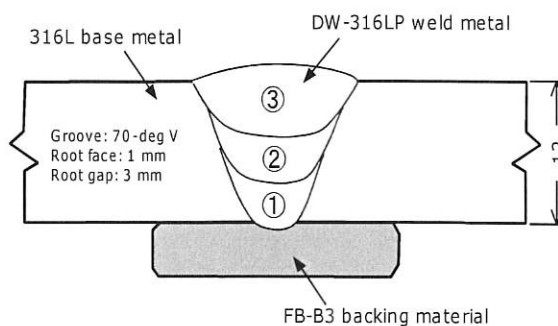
An example of the welding procedure with DW-316LP for the storage tank of a chemical tanker, a one-sided welding procedure using a FB-B3 refractory backing for the root pass in vertical-up position.
